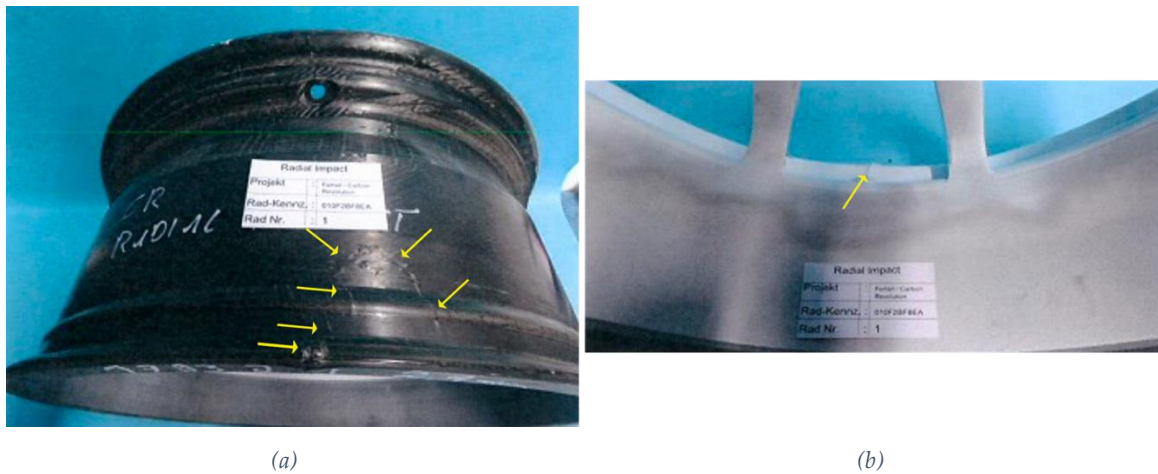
detail of damages on rim barrel for level 3 impact on the front composite wheel: (a) tyre side, (b) brake disk side
